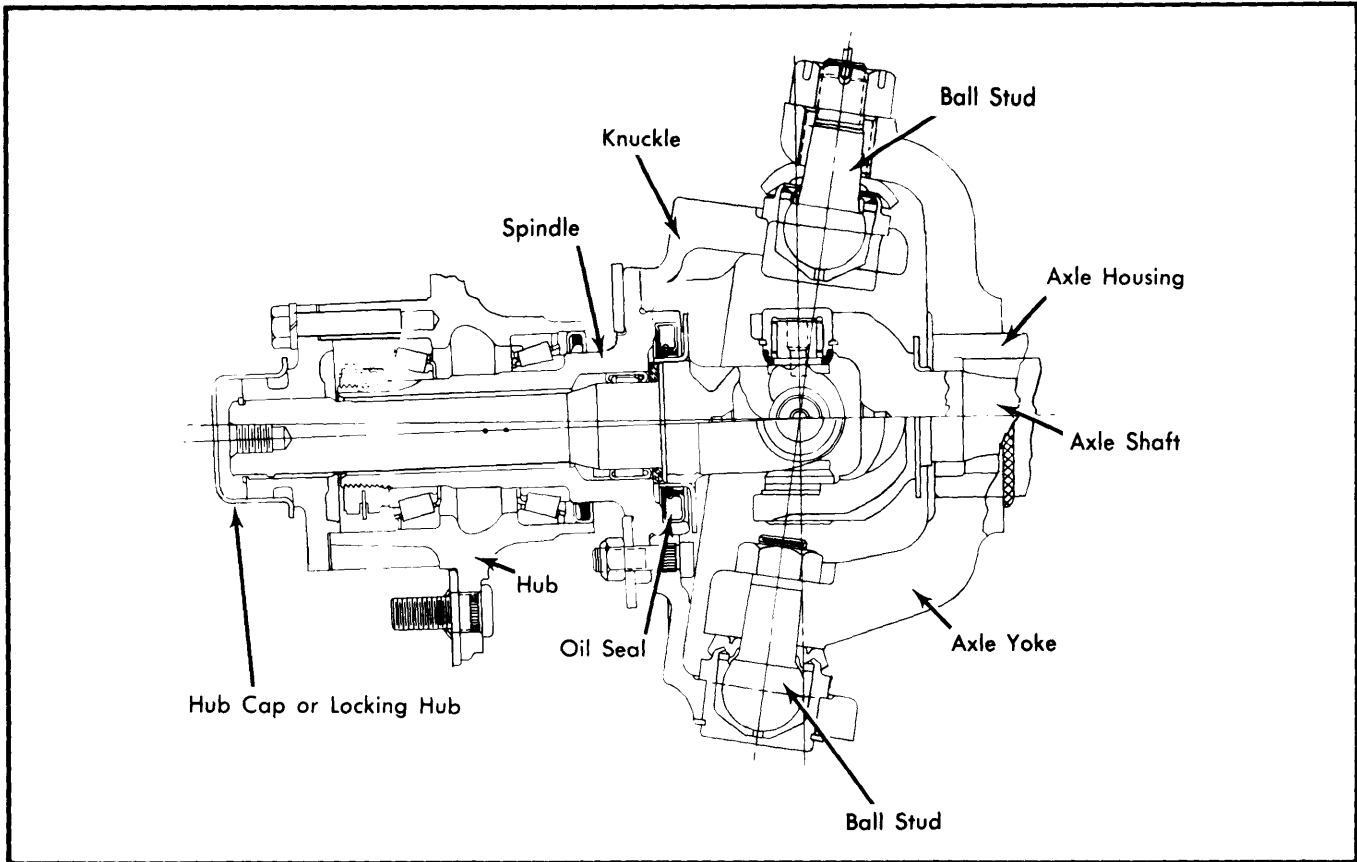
Sectional View of Ball Joint Type Steering Knuckle Assembly
